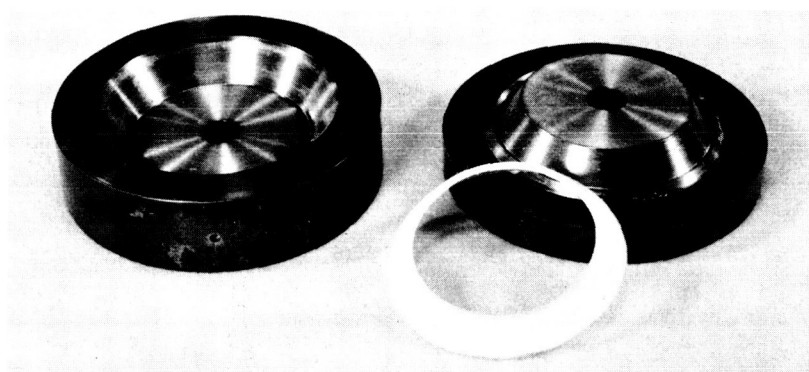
Lip Seal Encapsulation Tool Shown with Finished Lip Seal
